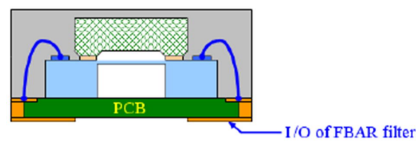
Packaged FBAR assembled onto LCP PCB from Lin et al. [162].
